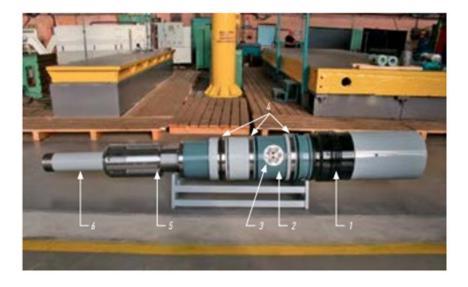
Prototype of tubing hanger, where: 1 - locking mechanism in valve bank body ofX-mas tree; 2 - TH main body; 3 - penetrator unit; 4 - metal-to-metal seals; 5 - position unit; 6 - adapter [25]
